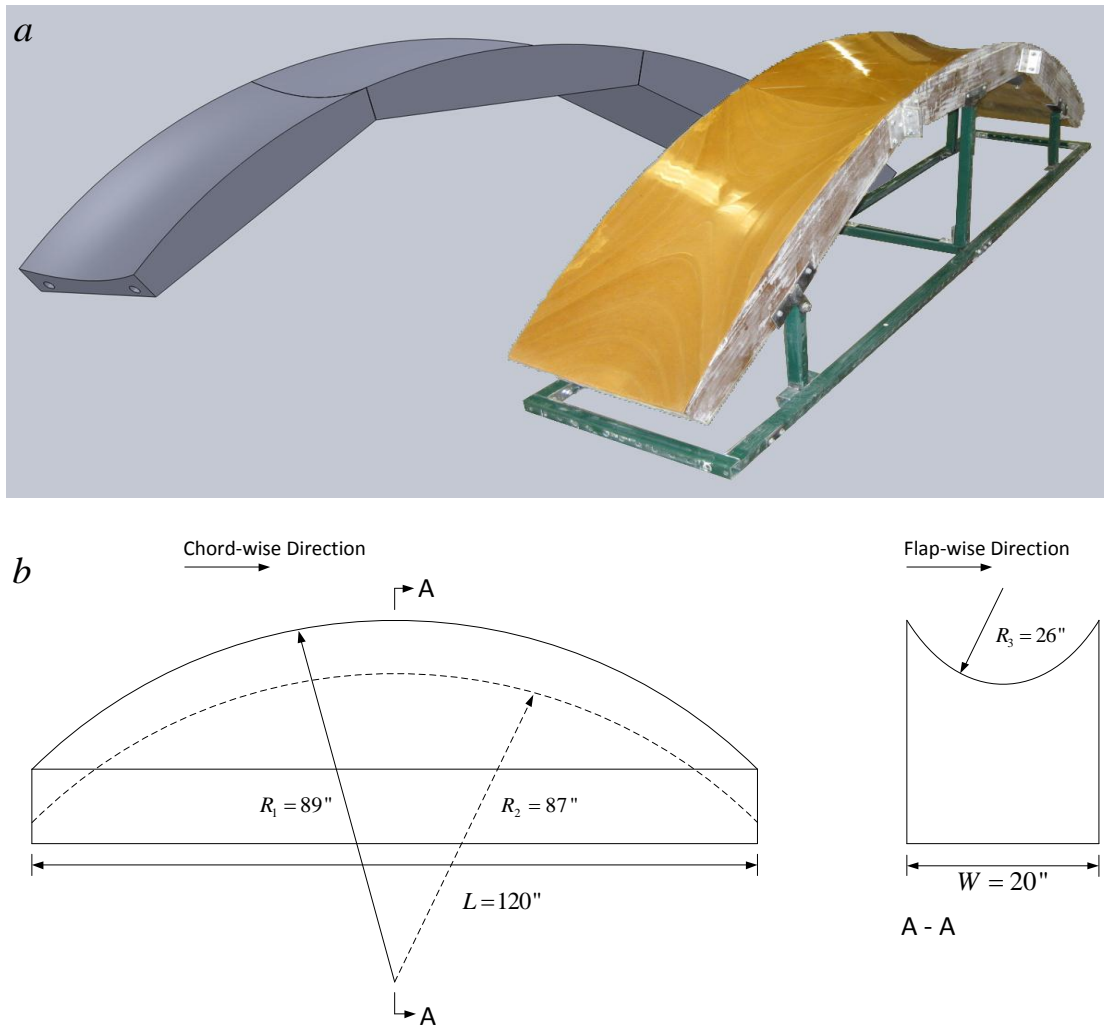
(a) 3D mold used in experiment; (b) mold dimensions.
